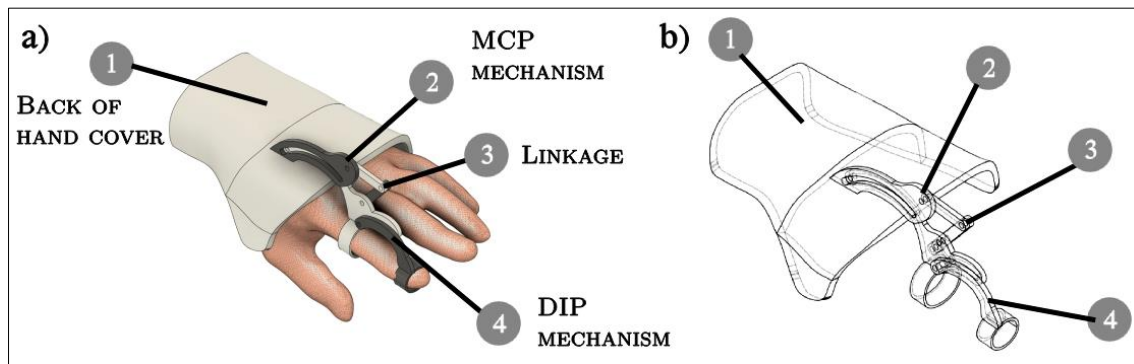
Exoskeleton design. a) Hatch view with edges. b) Layout view with hidden edges
